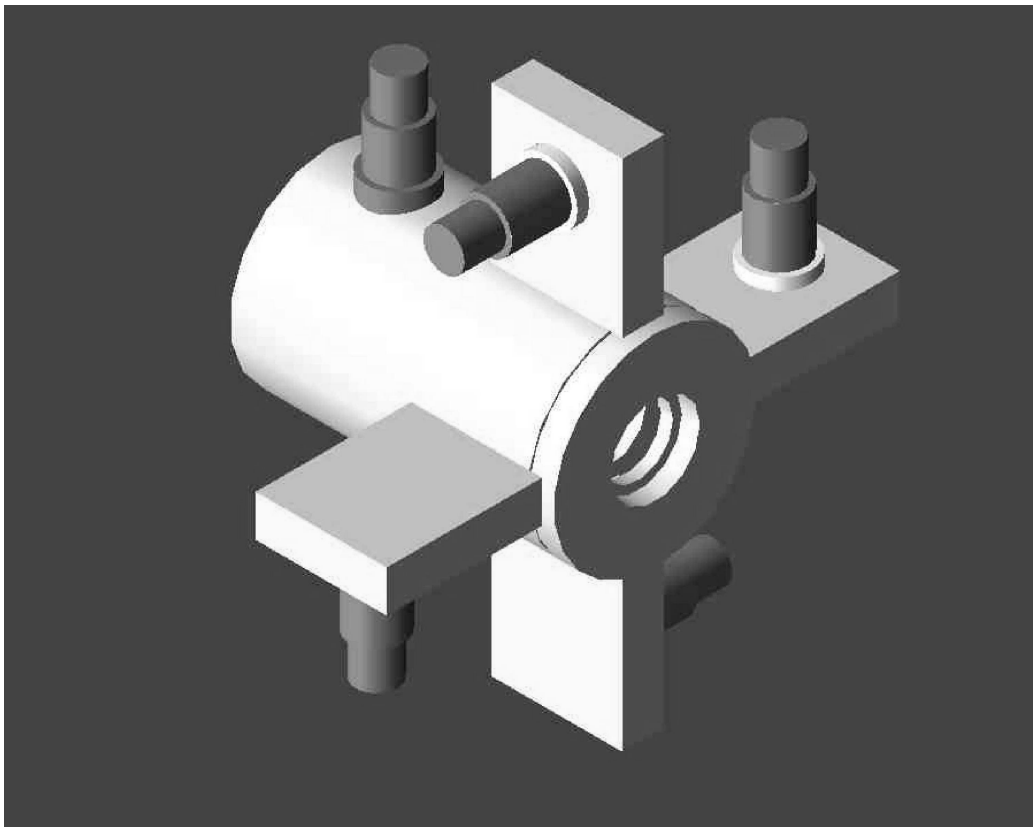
A 3-D view of the cavity BPM as mechanically designed.
